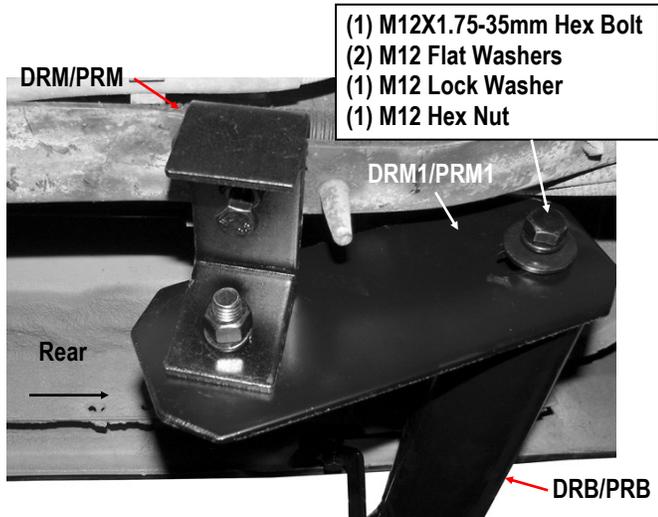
Passenger Rear Mounting Bracket (DRM/PRM) Installation
